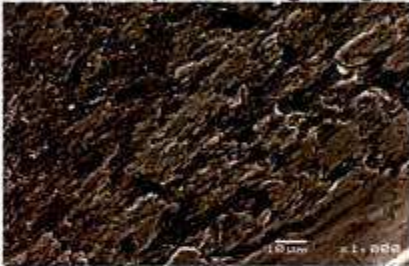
Fractograph - Bolt 3 (x1000, SEM)
